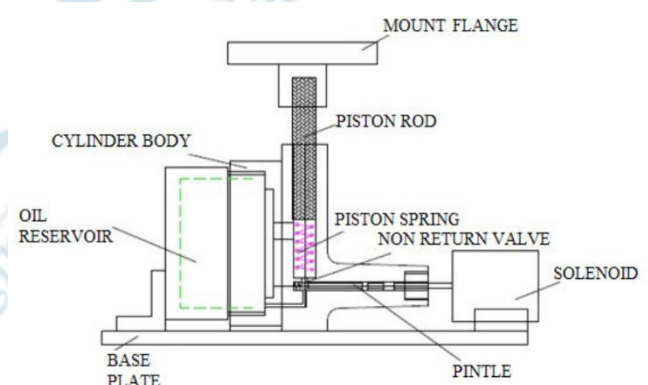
Assembly of Active-Passive Hydraulic mounts
